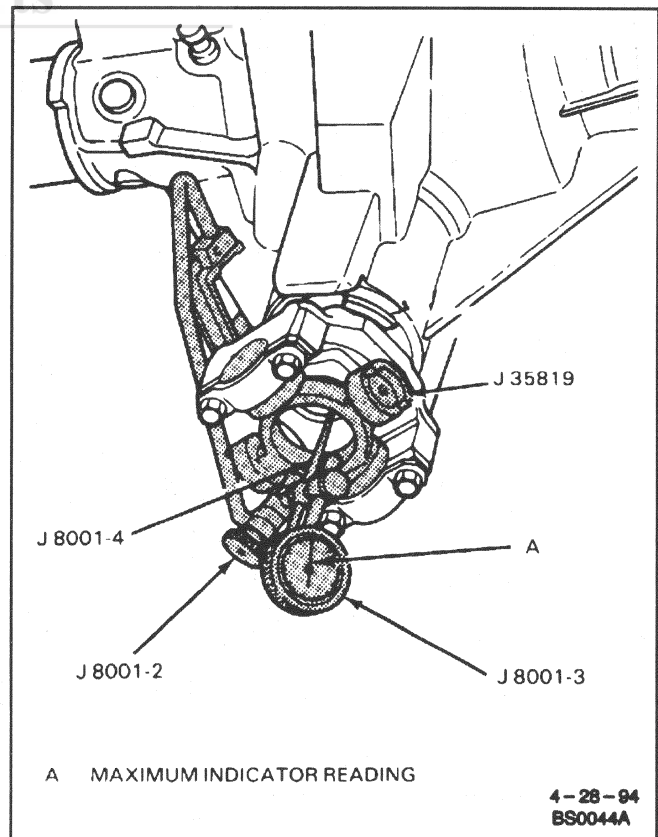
Differential Drive Pinion Gear Yoke Runout
